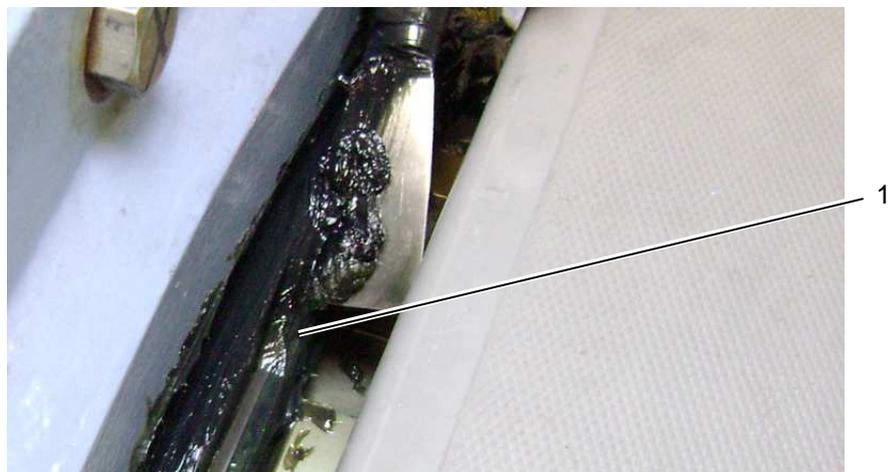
1 Cleaning the rotor bearing
